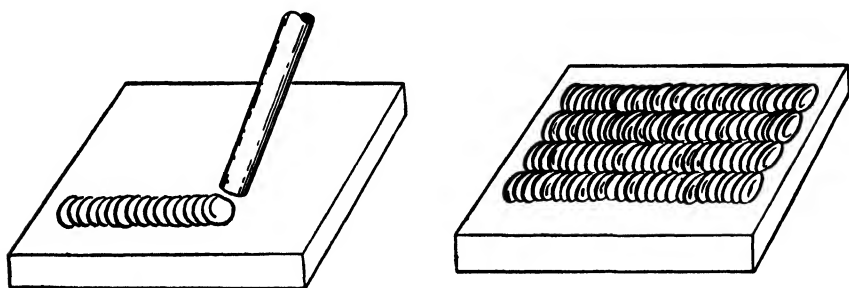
Making practice beads. Time and study spent in acquiring skill in running beads makes for rapid progress in learning to make types of welds used on farm equipment.
